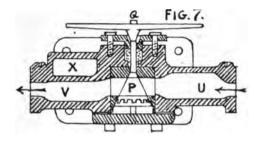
is a front section of cock-key (P) and water passages (U, inlet, and V outlet).
